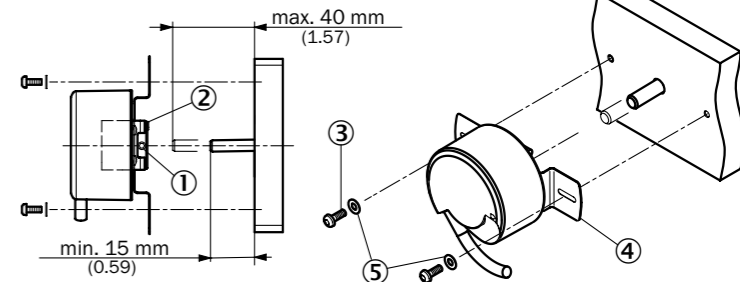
Mounting of DBS60 Core through hollow shaft with stator coupling (clamping at the front)
